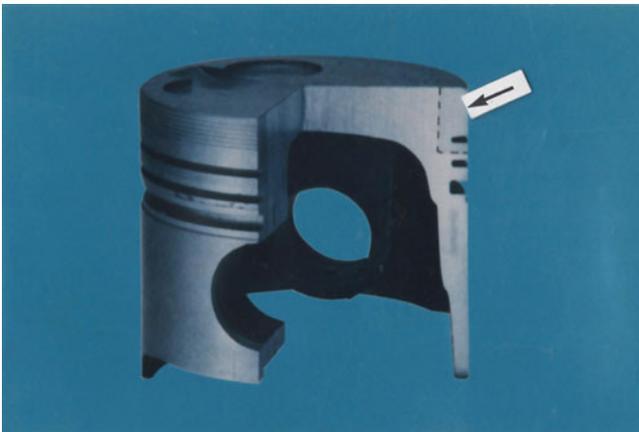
A cutout of a squeeze cast piston with MMC inserts indicated by *dotted lines*. [Courtesy of Toyota Motor Co.]
